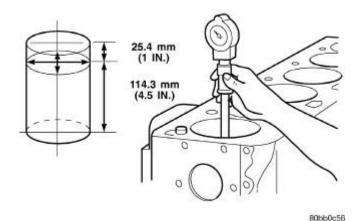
Measuring Cylinder Bore Diameter Courtesy of CHRYSLER GROUP, LLC
